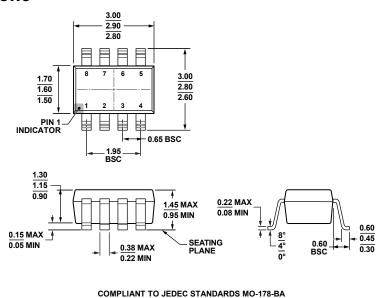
8-Lead Small Outline Transistor Package [SOT-23] (RJ-8) Dimensions shown in millimeters
